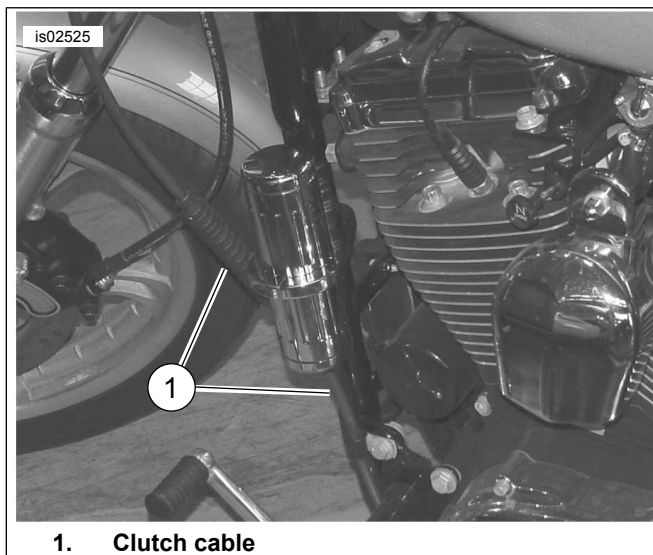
Mounting Location (Left Side XL Sportster Shown)
